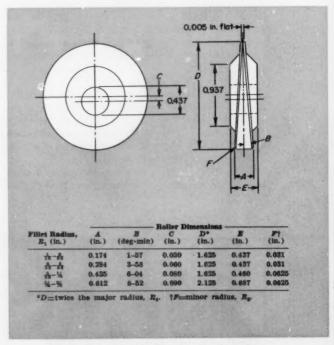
Recommended dimensions⁹ of wedgeshaped roller design,⁸ for rolling small fillets.
